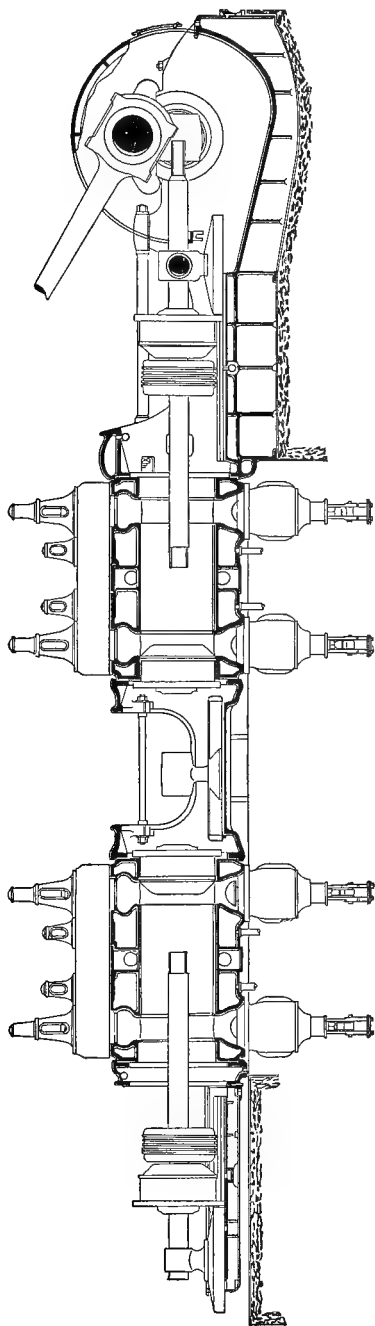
Showing Method of Removing Pistons (Nürnberg Patent).
